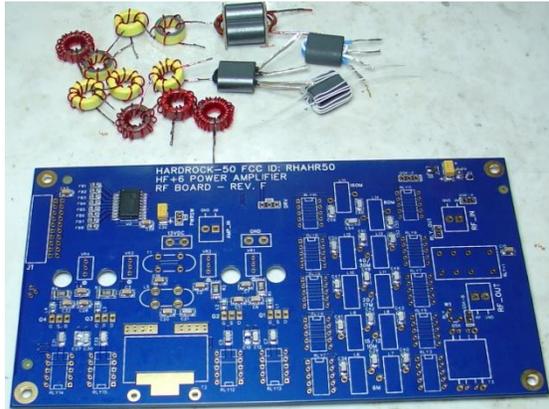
Unassembled amplifier pc board Figure 6: Completed amplifier assembly
